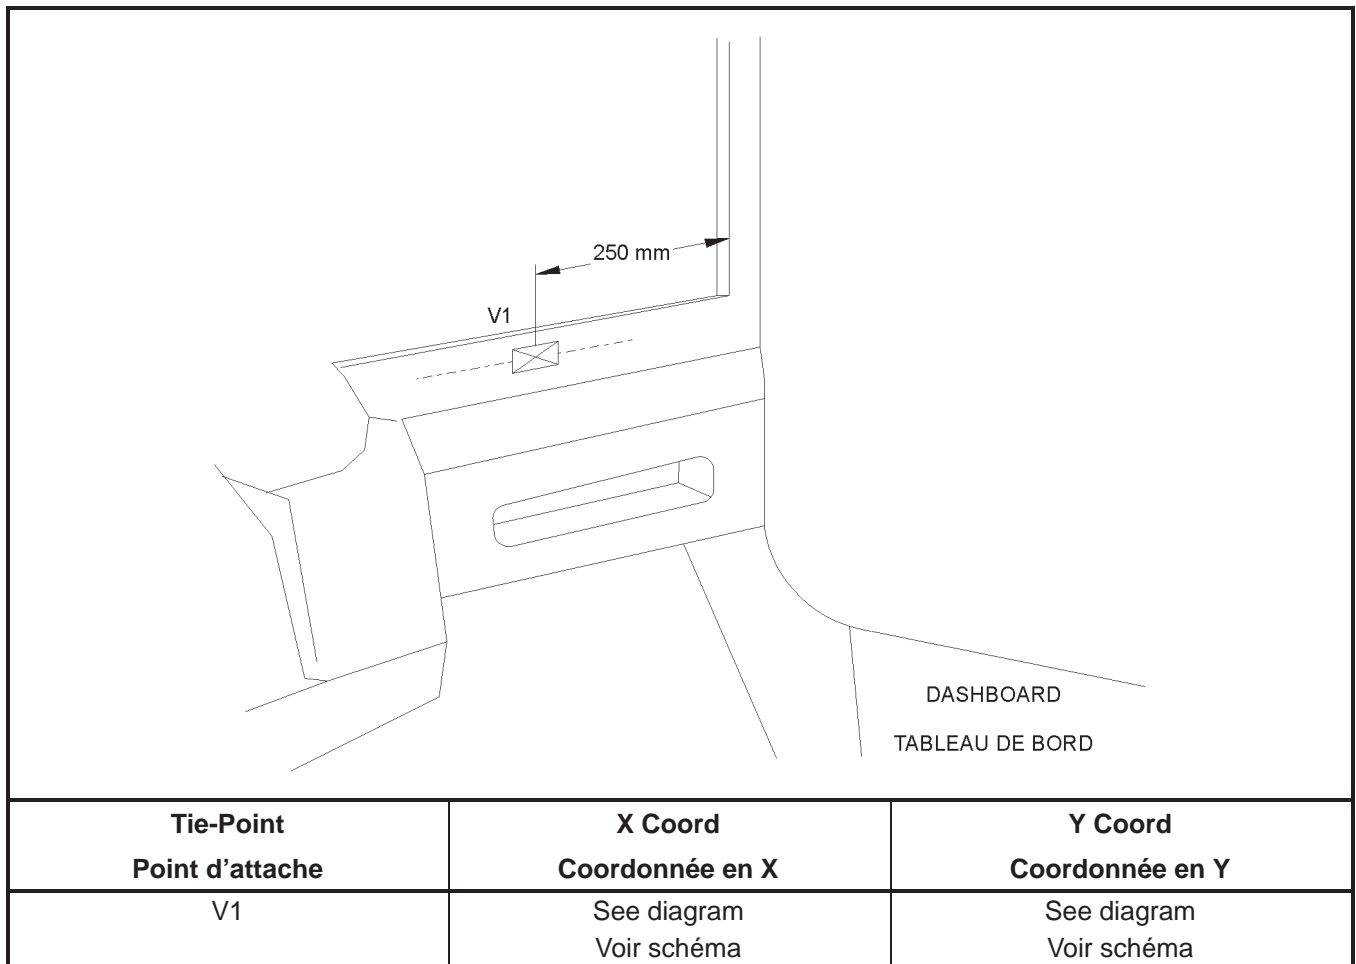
Installation of Velcro Adhesive Cable Tie – AC94
